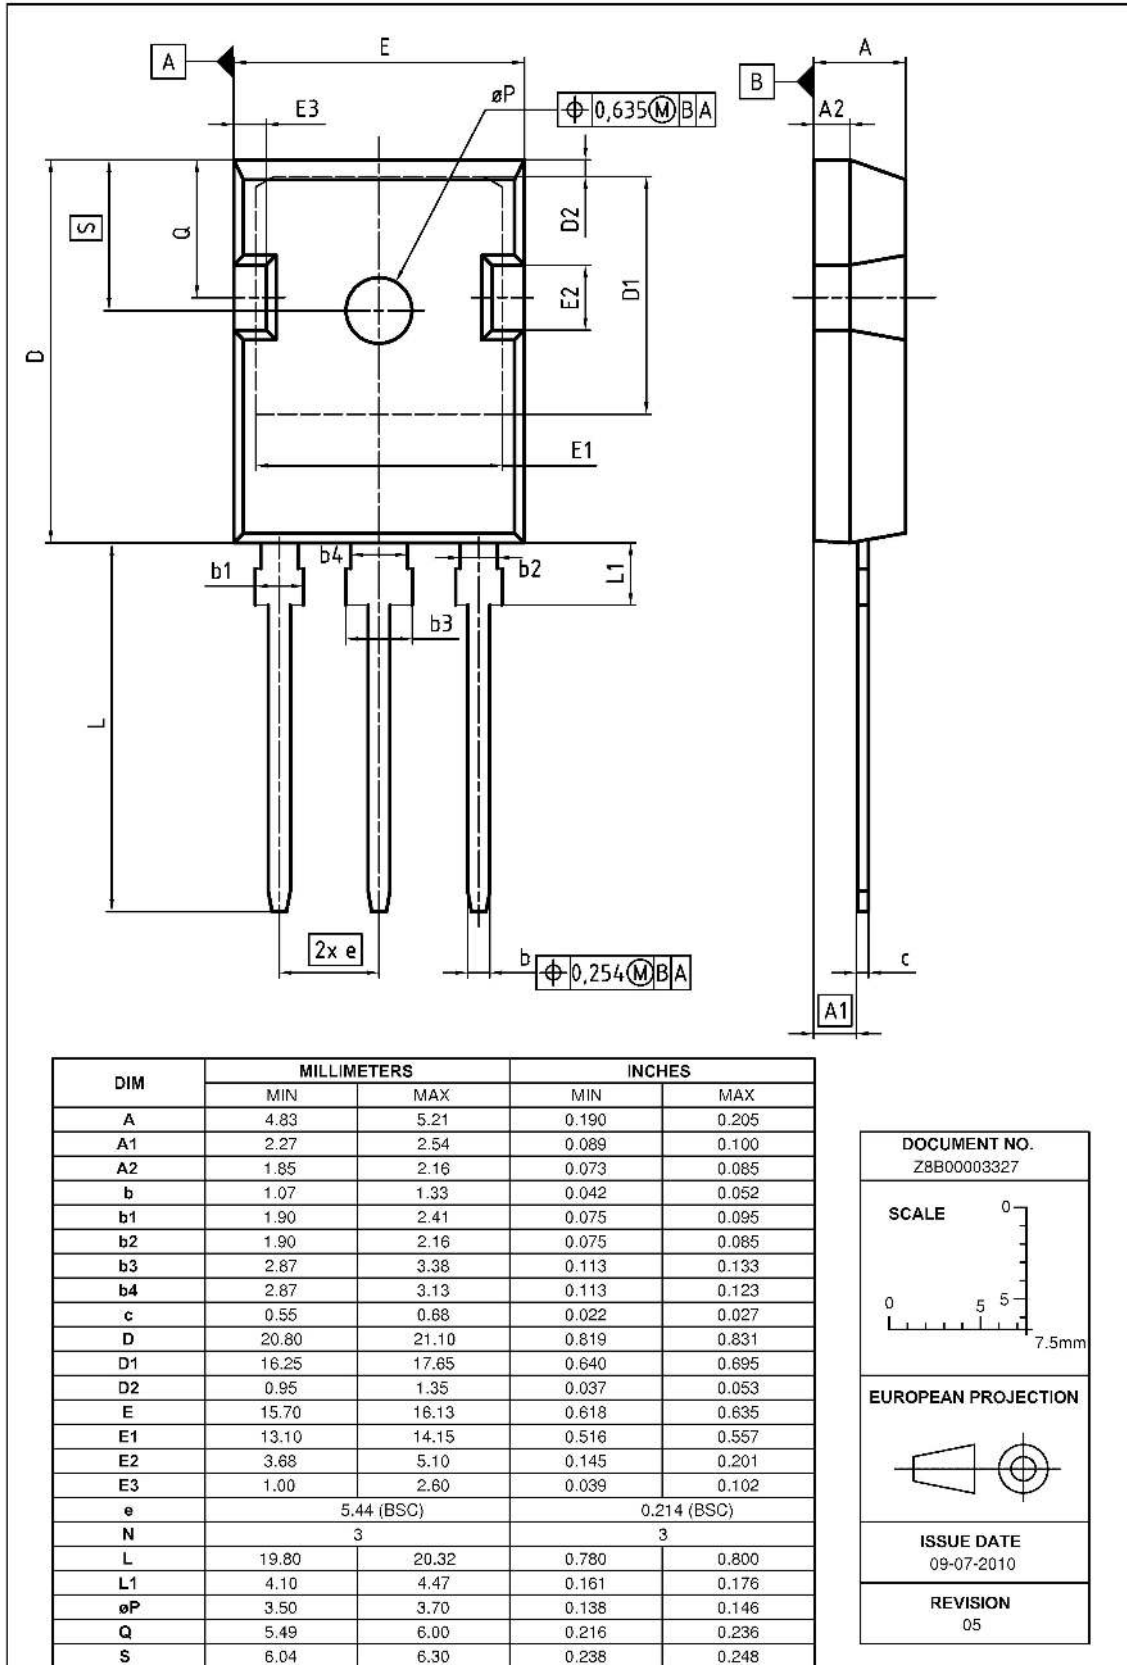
Outline PG-TO 247, dimensions in mm/inches
